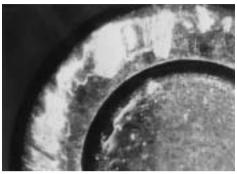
Scratches on Larger Side Surface of Tapered Roller Bearing
